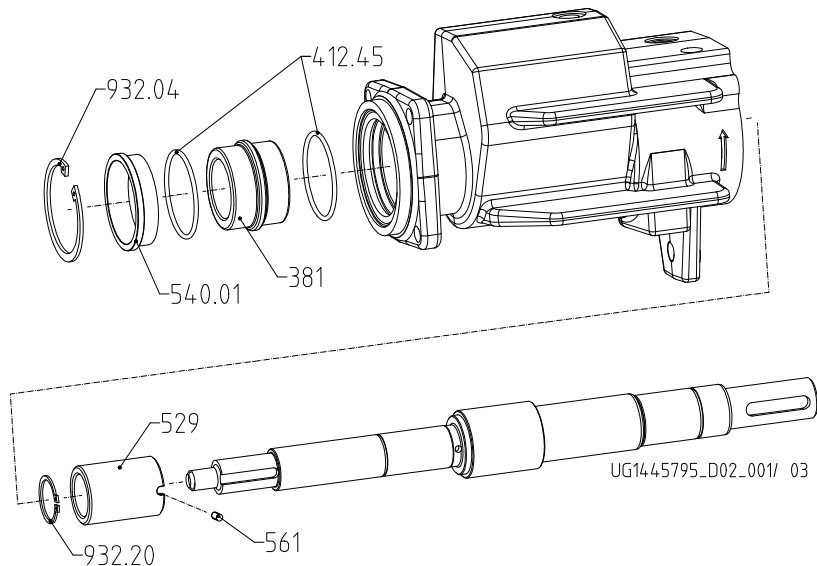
Exploded view of Etanorm SYT, bearing brackets WS_25_LS / WS_55_LS with SiC plain bearing
